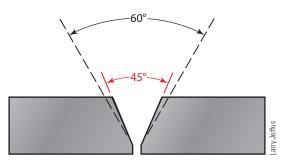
A smaller groove angle reduces both weld time and filler metal required to make the weld.
